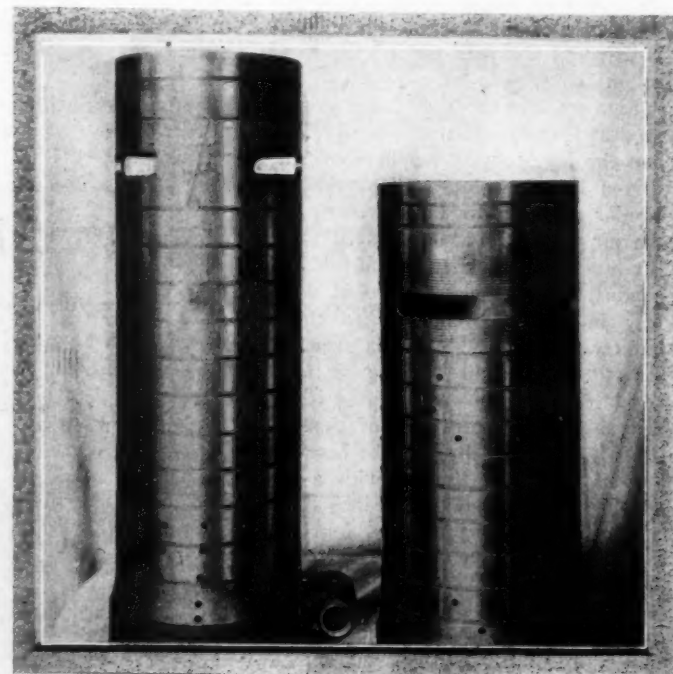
General view of the inner and outer sleeve, showing method of slotting and diagonal drilling for lubrication
